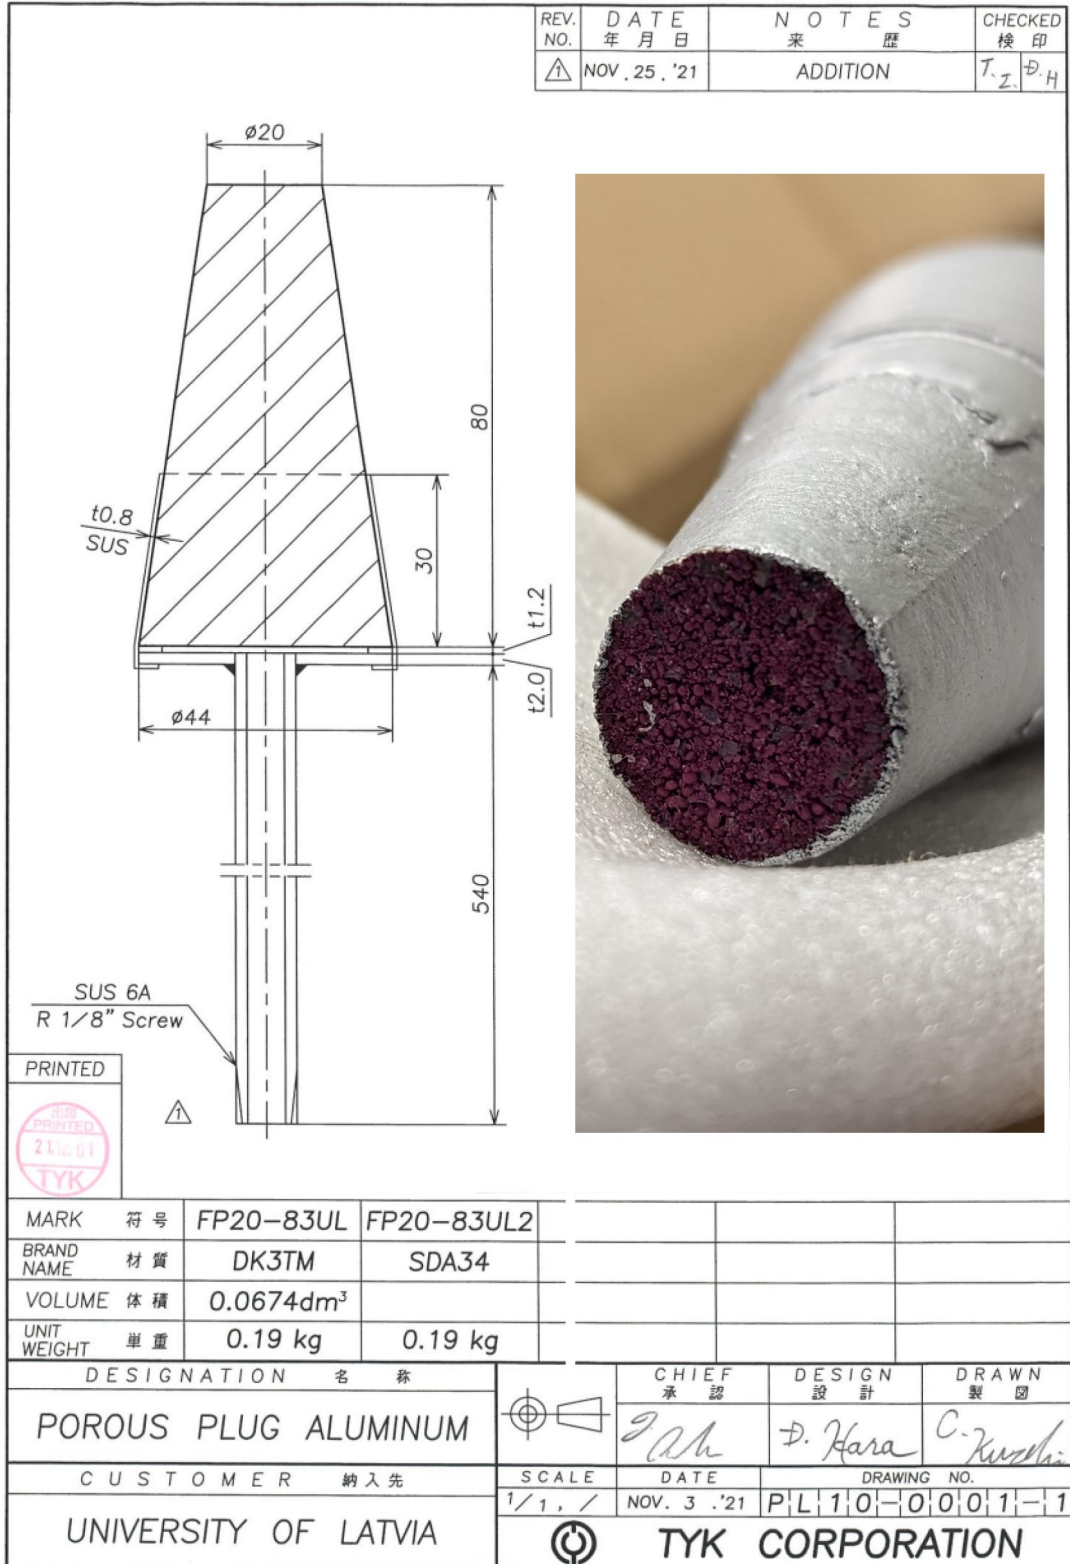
Technical drawing of a porous plug and a picture of end of the plug which will be exposed to aluminum; This plug has a flow rate of around 5 – 10L/min at 0.1MPa. Composition: Al_2O_3 – 91.1%; Cr_2O_3 – 1.7%; SiO_2 – 6.7% and ZrO_2 – 3.0%, apparent porosity - 23.8 %
